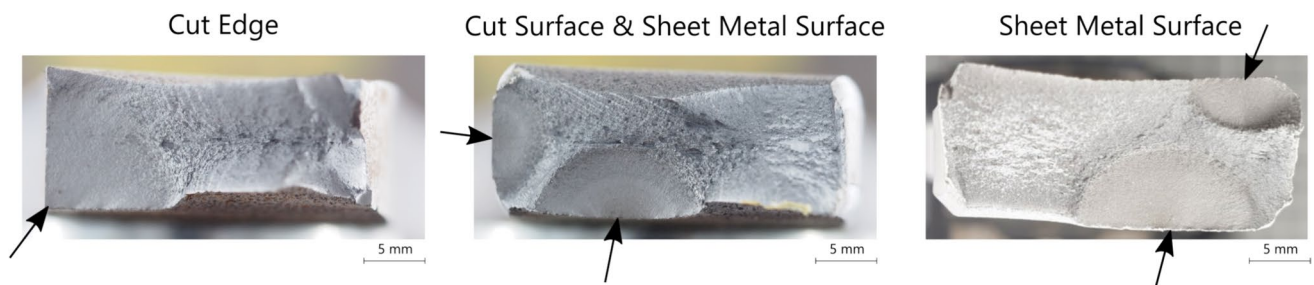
Location for crack initiation during fatigue tests of thermal cut edges, location at corner of edge (left), cut surface (middle), and sheet metal surface (right), locations of crack initiation marked by arrows
